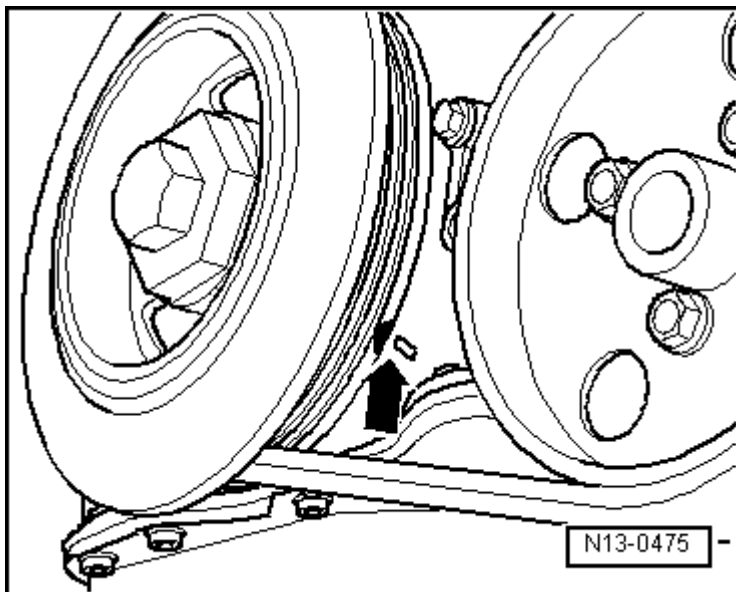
Identifying Crankshaft At Vibration Damper Securing Bolt In Engine At TDC Cyl. 1
